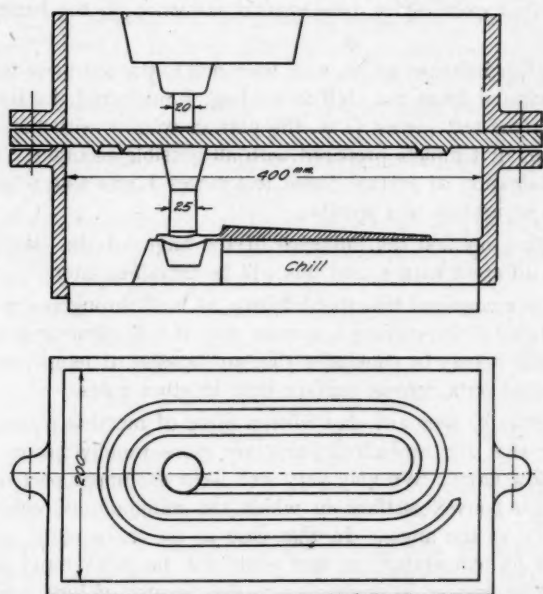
DEVICE RECOMMENDED FOR MOLDING A COMBINED HARDENING TEST PIECE AND FLUIDITY TEST PIECE
